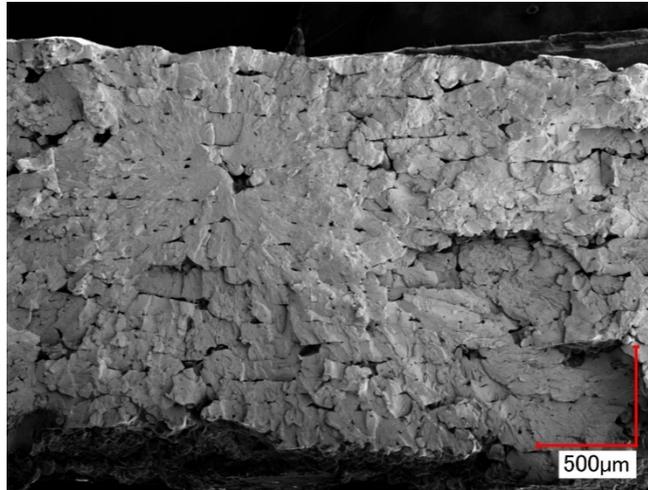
Fracture surface of the part obtained with Gaussian profile laser
